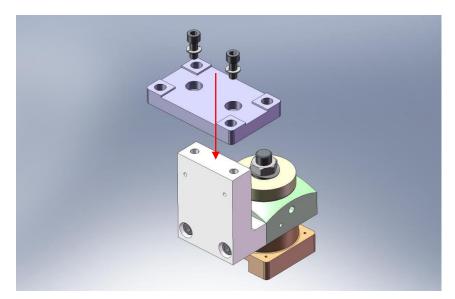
Add Base Plate, to complete Vertical Position Sensor Assembly (accept for sensor).
